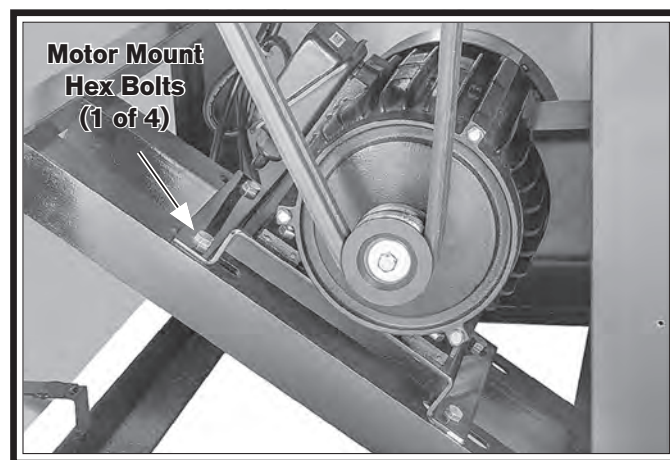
Locations of motor mount bolts. (shown from side for clarity).
